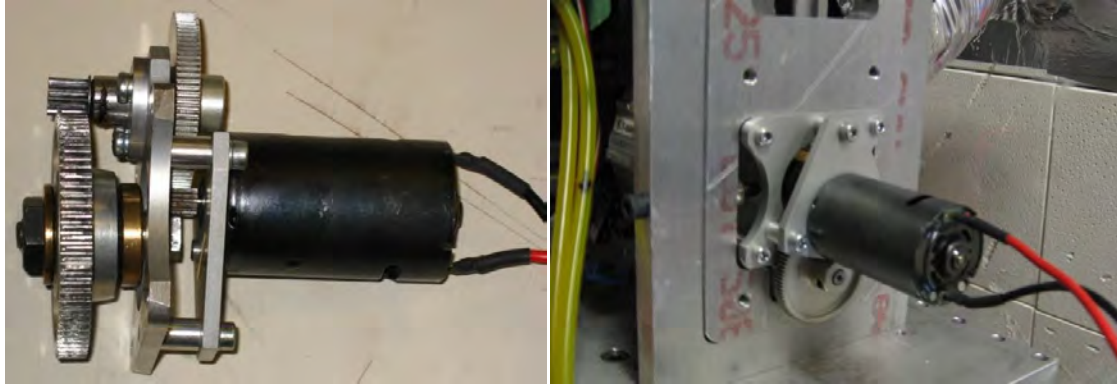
Starter motor assembly for Honda GX25 (left), starter motor mounted on ICE (right)
